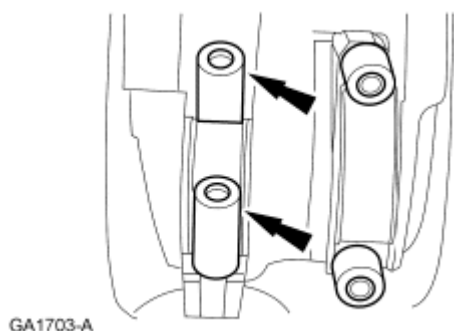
Locating Rubber Hose Pieces On Connecting Rod Bolts
